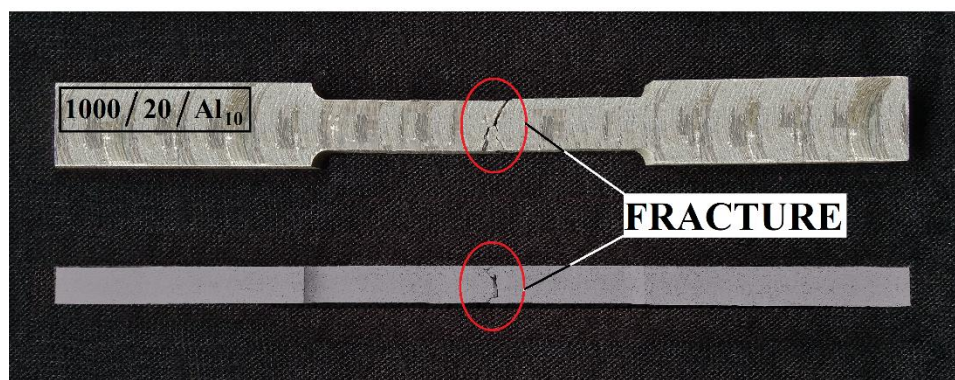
Macro image of fractured tensile test specimen of aluminium alloy plate with friction stir welded joint, and tensile tested in the direction of weld.
